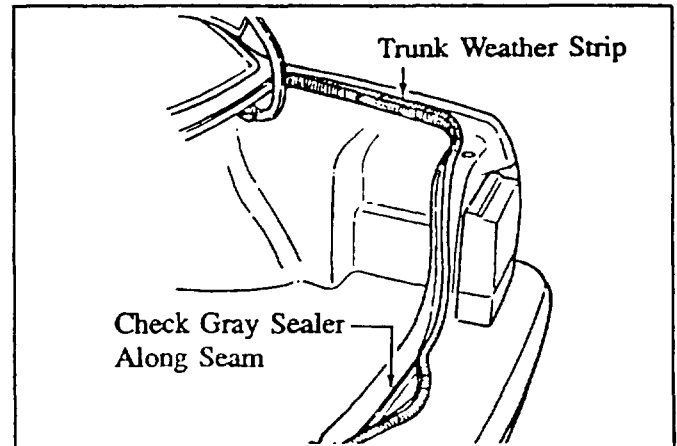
Checking Grey Sealer Under Trunk Weatherstrip
